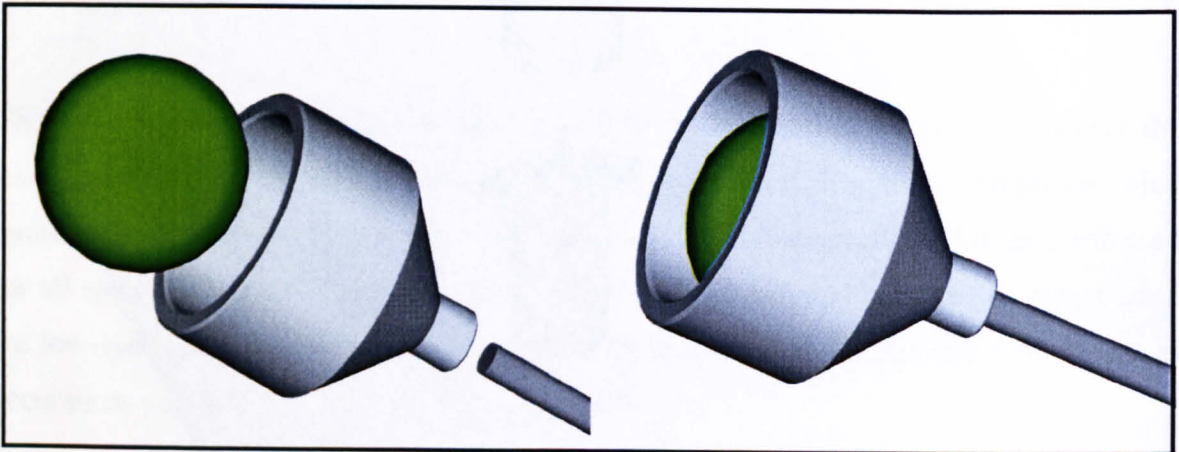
Jig used to accurately assemble the ball onto the bar.
